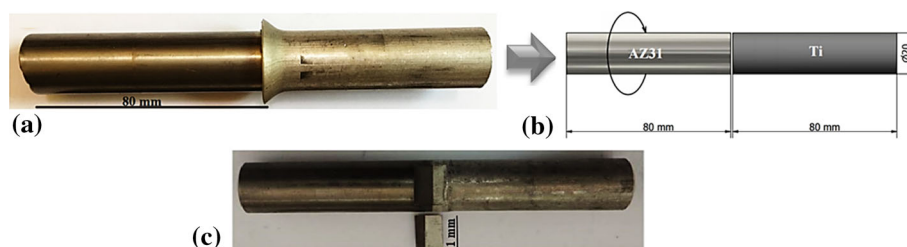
(a) Workpieces, (b) the coated Ti/AZ31 weld joint and (c) the Ti/AZ31 weld joint prepared samples
